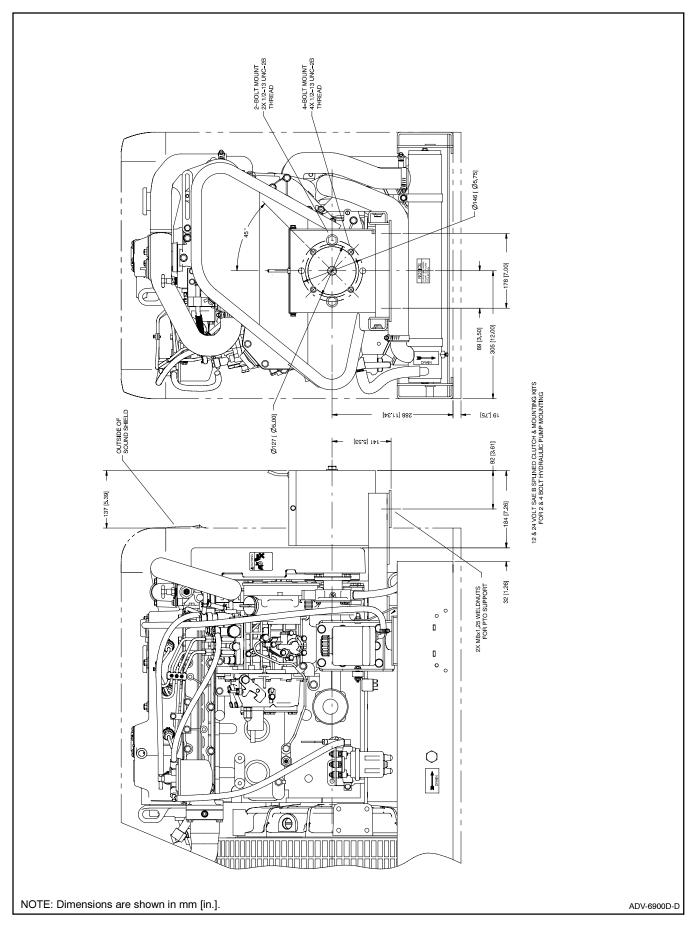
Dimension Drawing, 28/32EOZD and 23/27EFOZD with Electric Clutch
